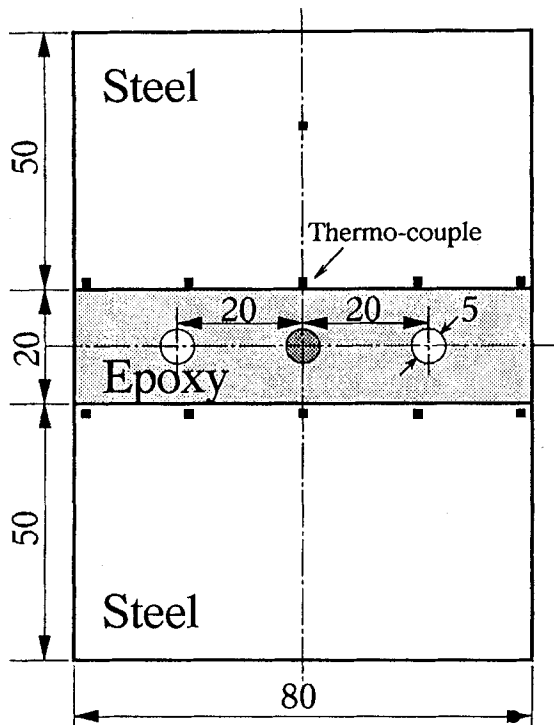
Dimensions of adhesive butt joint used in photoelastic experiment.
